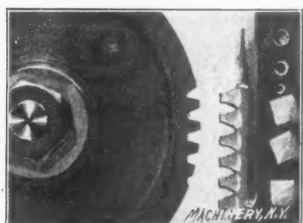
Fourth Position: Blank withdrawn from the Cutter
